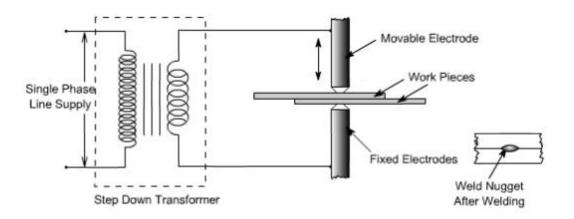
Schematic of resistance spot welding (Millers ,2010)
